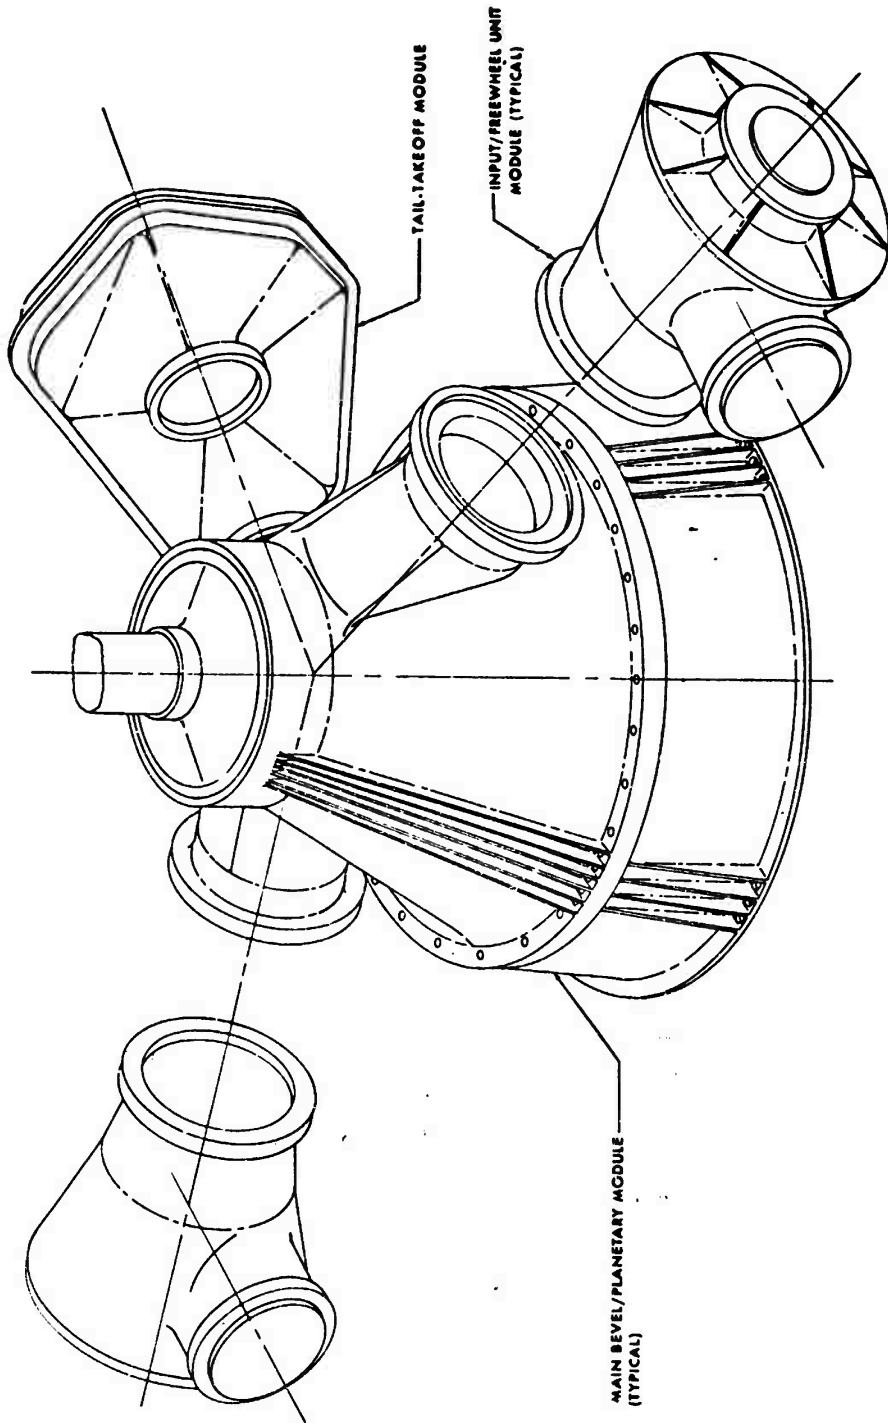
Exploded Isometric Drawing of CH-54B Main Transmission, Four-Module Configuration.
